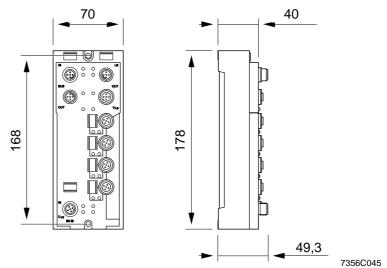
Housing dimensions in mm for Fieldline Modular devices (M12)
